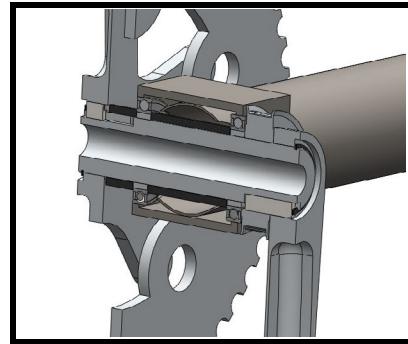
Back crank axle using keyed shaft, snap rings, and bearings
